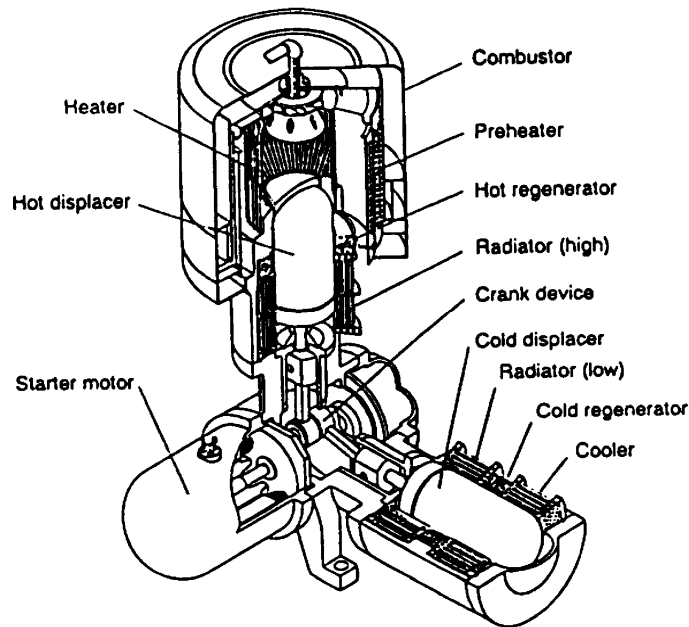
Schematic view of the Sanyo domestic heating Vuilleumier heat pump [8].
